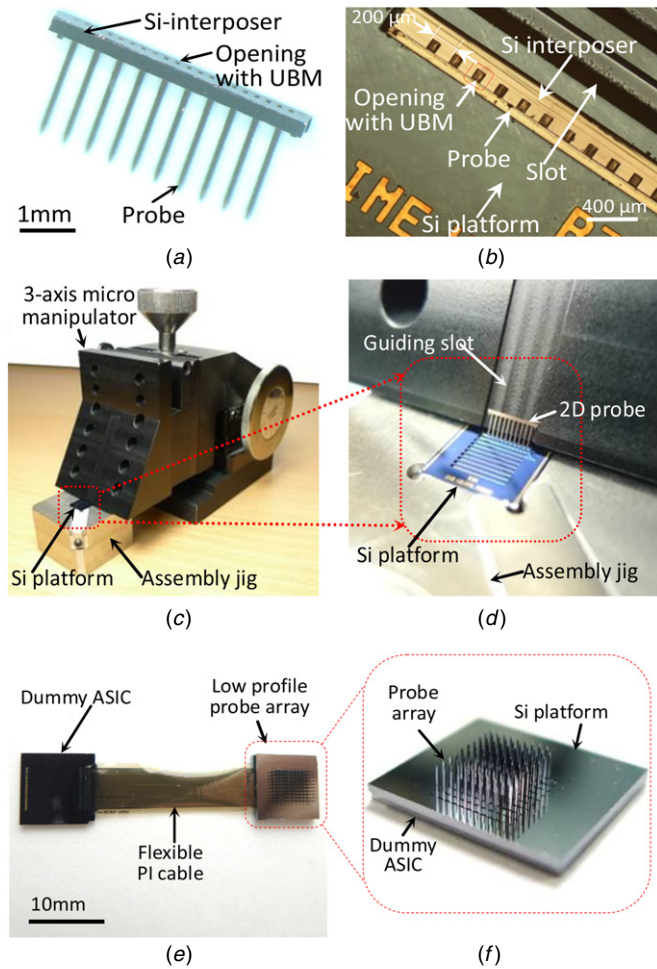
Assembly results. (a) Probe bonded with the Si interposer. (b) Si platform with the probe and Si interposer inserted into its slot. (c) Probe array assembly process by using a 3-axis micromanipulator. (d) Magnified view of the 2D probe bonded with the Si interposer sliding into the slot of the Si platform. (e) Assembled 3D probe array integrated with the dummy wireless power/data ASIC and the PI cable. (f) Magnified view of the low-profile probe array.
